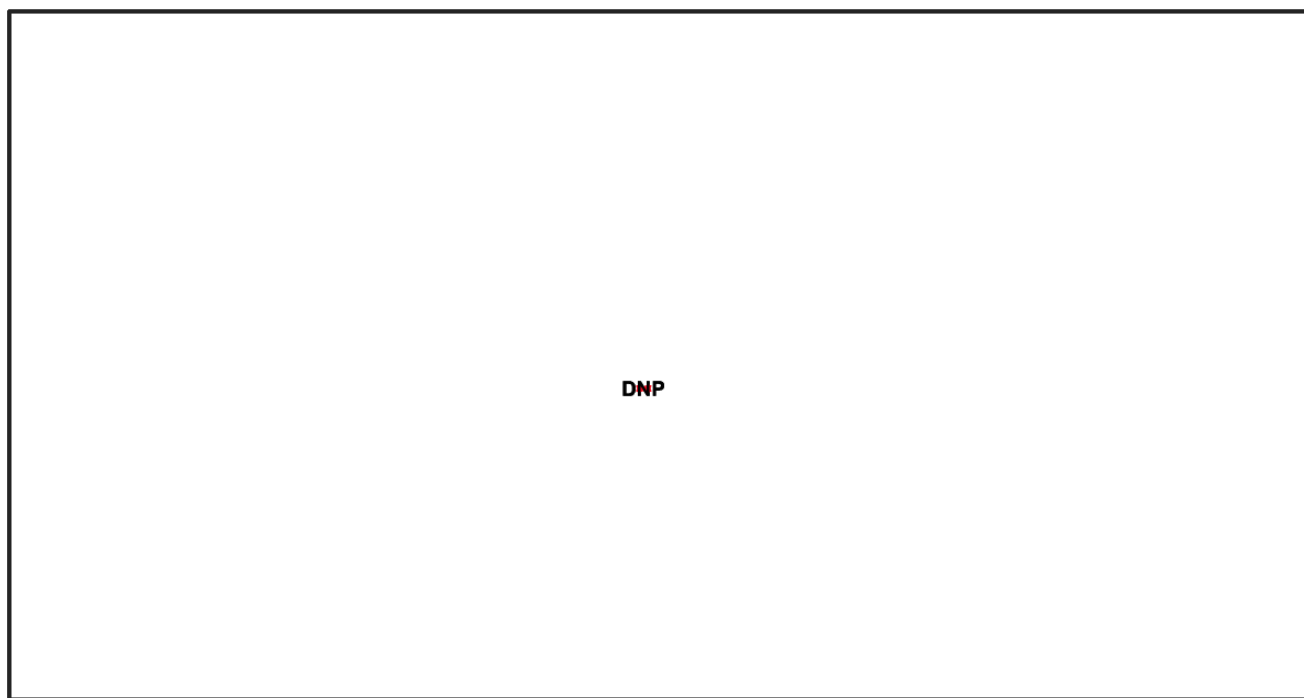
UCD3138064AEVM149 Bottom Assembly Drawing (no Components on This Side)
